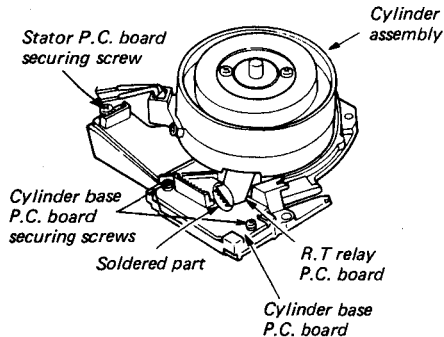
Relay P.C. board and cylinder base P.C. board
